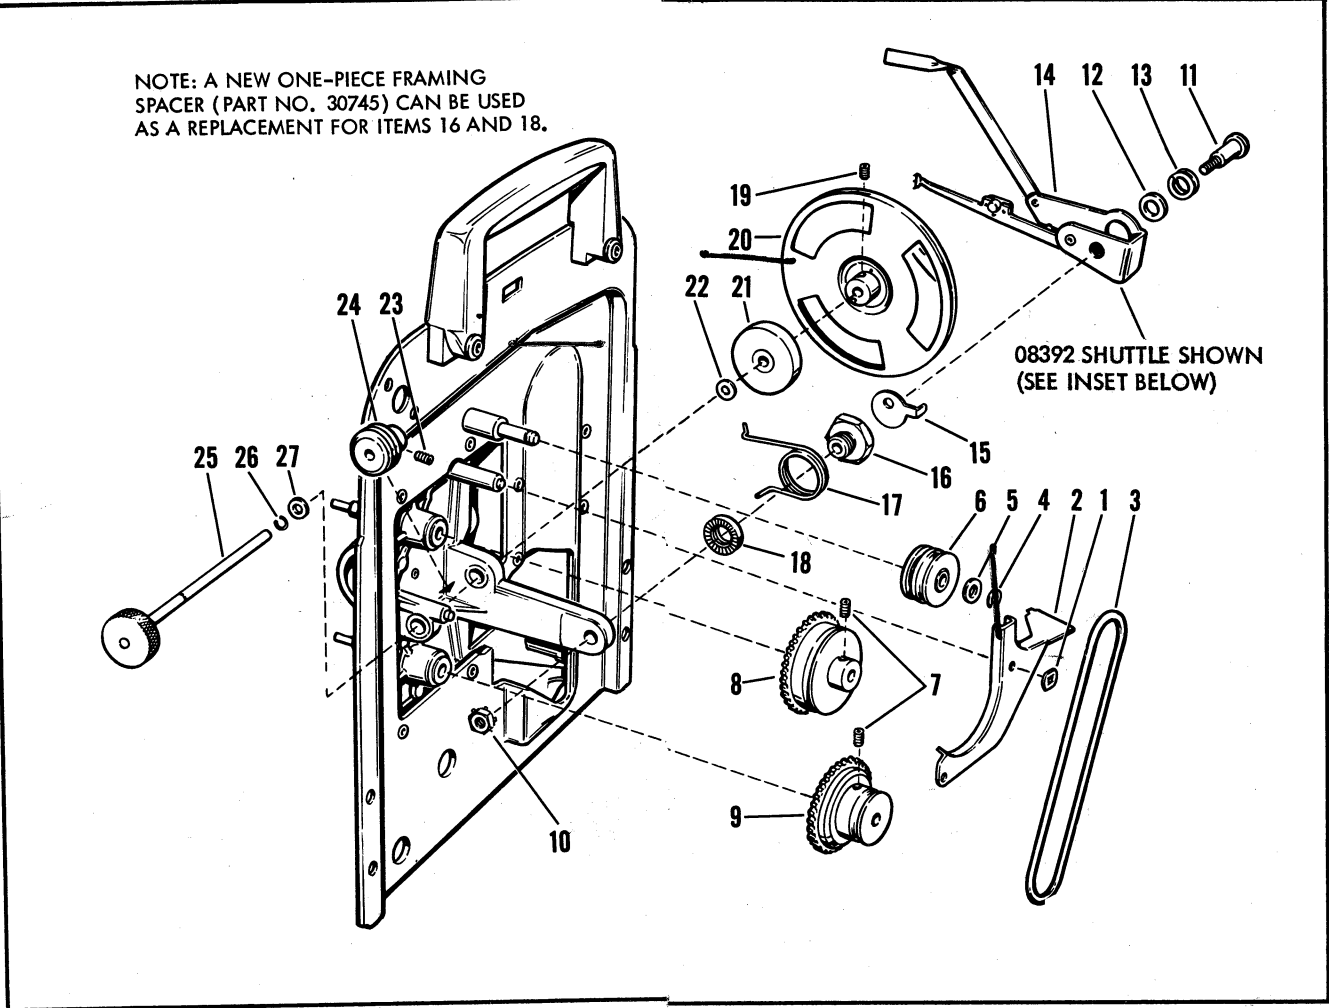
Shuttle and Gearing Models 253A, 253AX and 253B)
